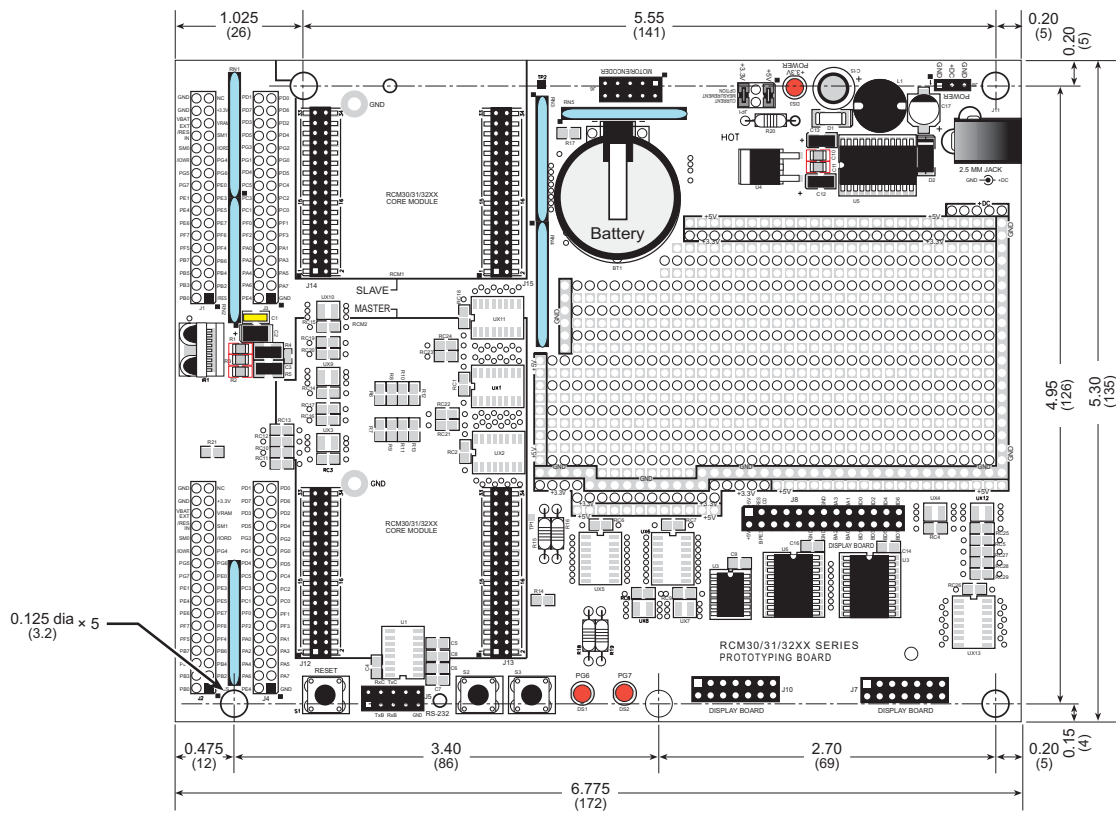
RCM30/31/32XX Prototyping Board Dimensions
